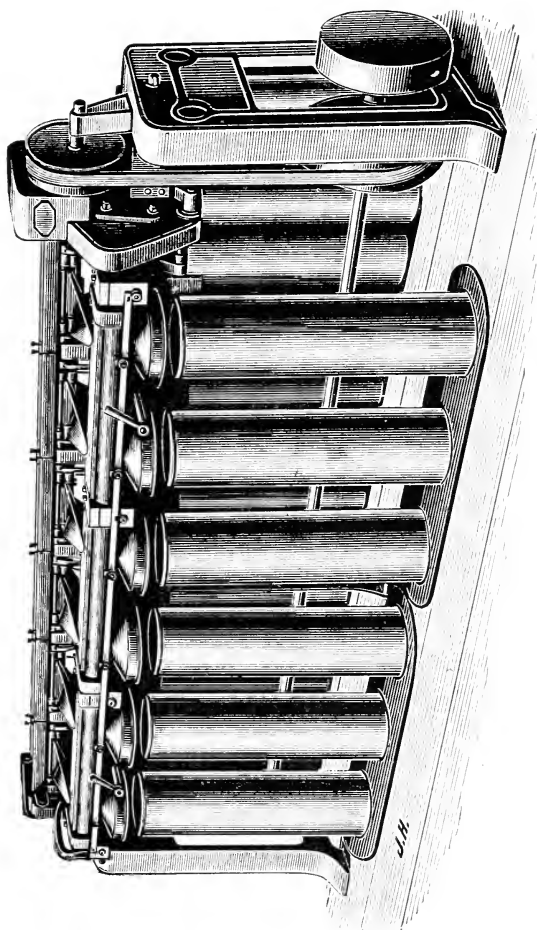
THE DRAWING FRAME (FRONT VIEW).
